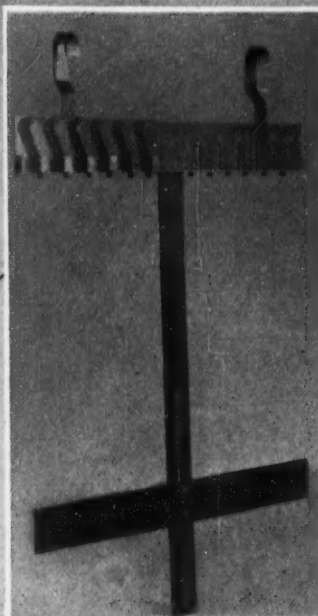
This fixture is 4' 3" in overall length and 3' 0" in overall width. The upper part of the fixture is of 34 ST Aluminum and the spine and bottom cross piece are of "micarta". This fixture is used to anodize thin or sheet aluminum parts; two fixtures being used together, one at one end of the sheet and the other fixture at the other end of the sheet. The slots are 1/4" wide and 3" deep. This fixture has a capacity of 12 sheets and can be made to take any width sheet that the customer may have to anodize. Gates long sheets of light gauge may require a third fixture for support at the center.
